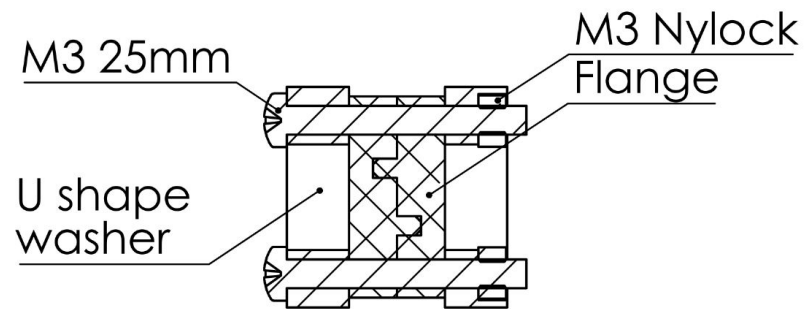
Cross section diagram of two mated flanges held by bolts passing through mild steel washers. Nylon locking nuts are used with stainless steel M3 bolts.
